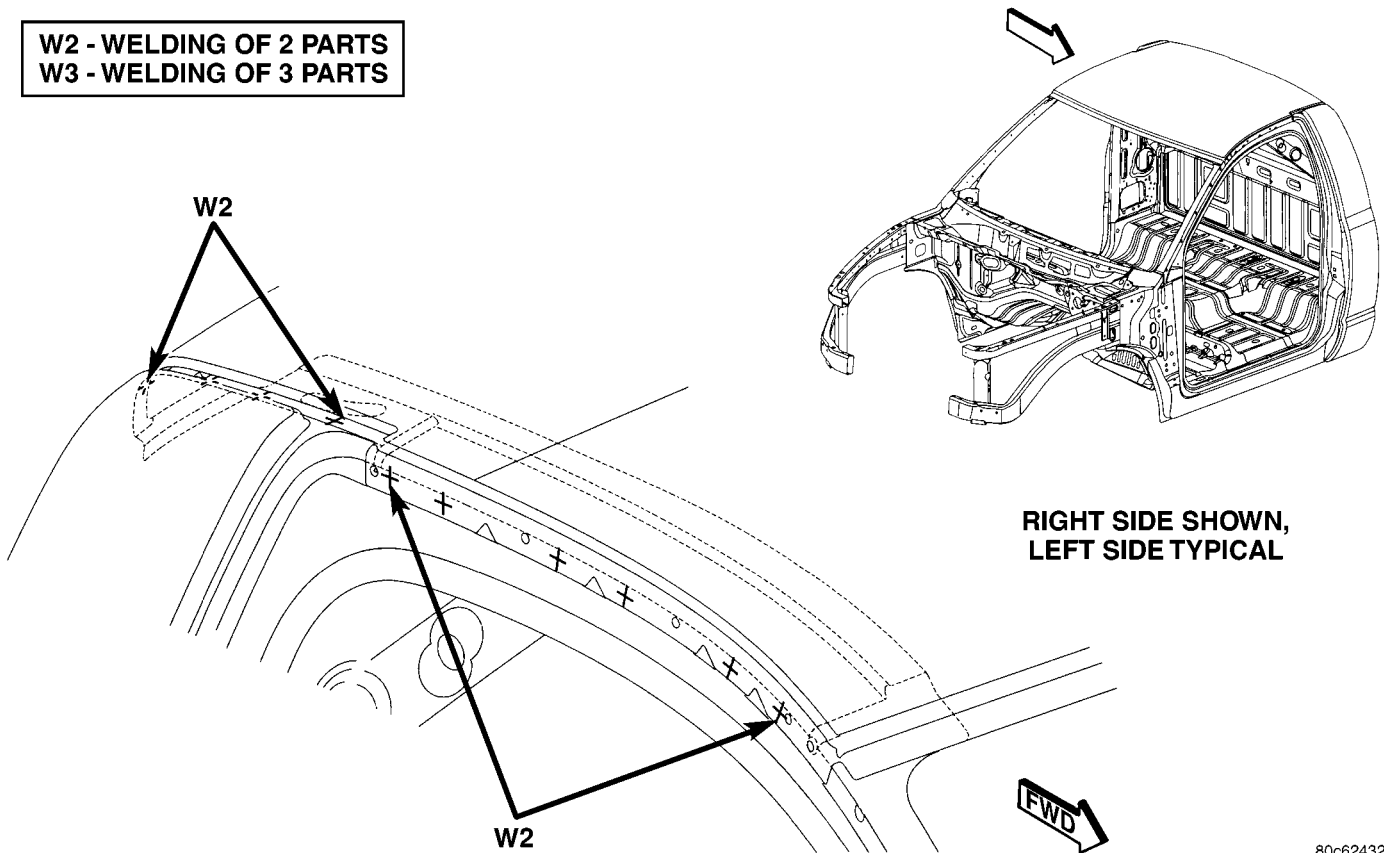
OUTER ROOF PANEL - STANDARD CAB
